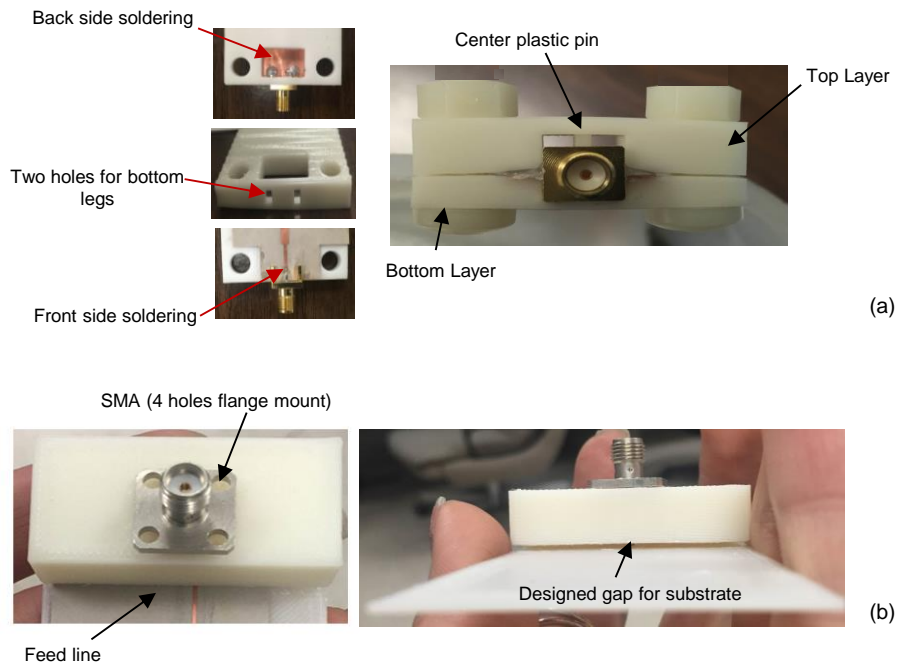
Antenna sensor and SMA connector fixture; (a) first configuration; (b) second configuration
